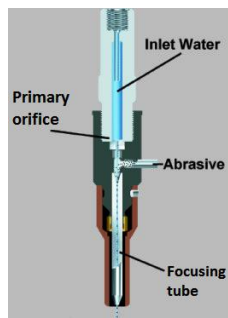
Section view of the cutting head of an abrasive water jet machine
